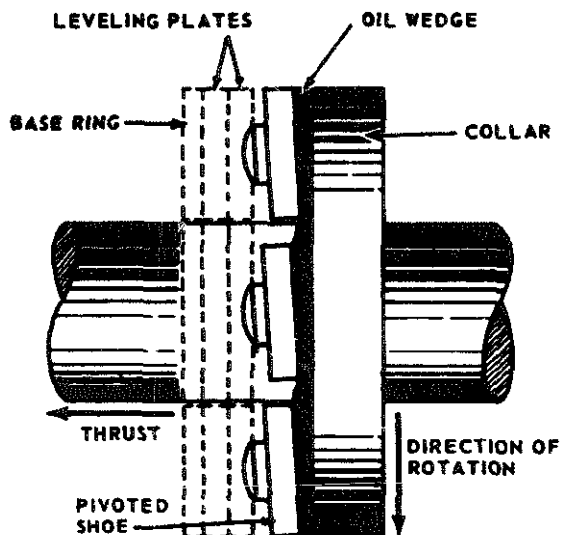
Kingsbury pivoted-shoe thrust bearing.
